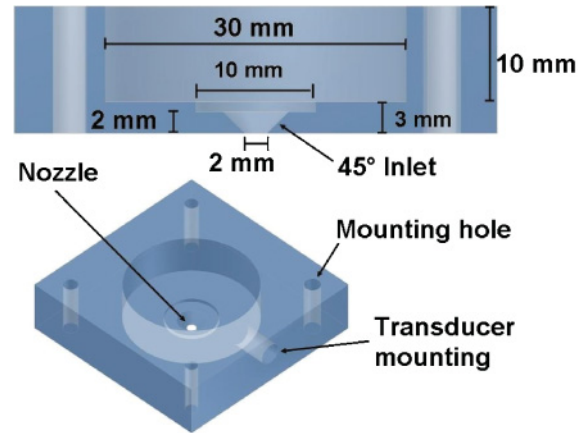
(Color online) Dimensions of the nozzle machined in perspex for the present work. Dimensions in scale.
